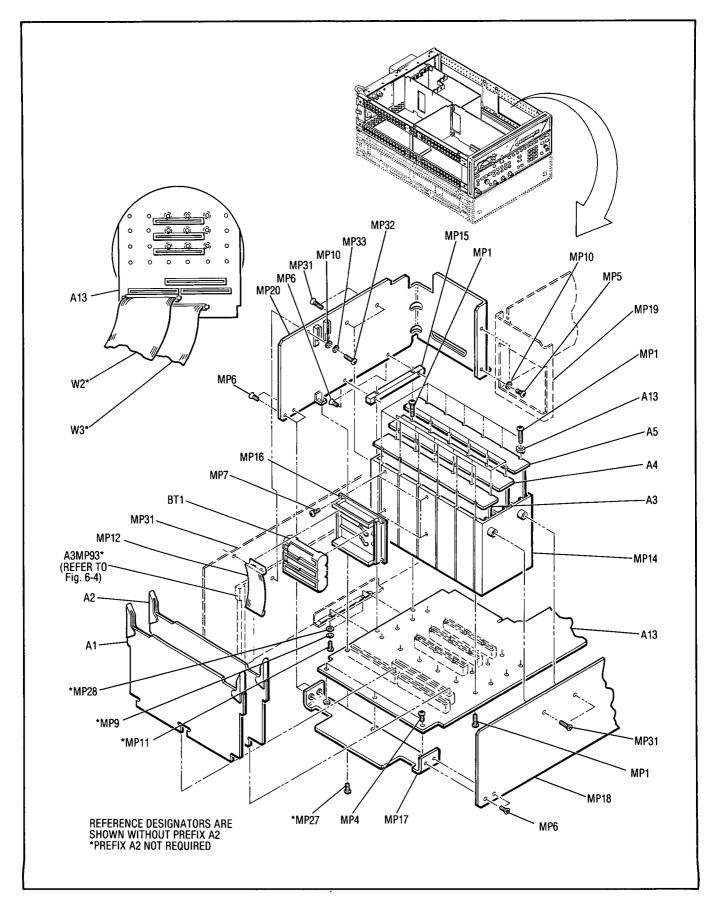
P/O A2 Controller Assembly Parts Identification
